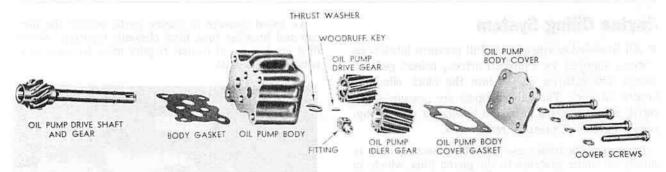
PARTS OF THE CHAMPION OIL PUMP
